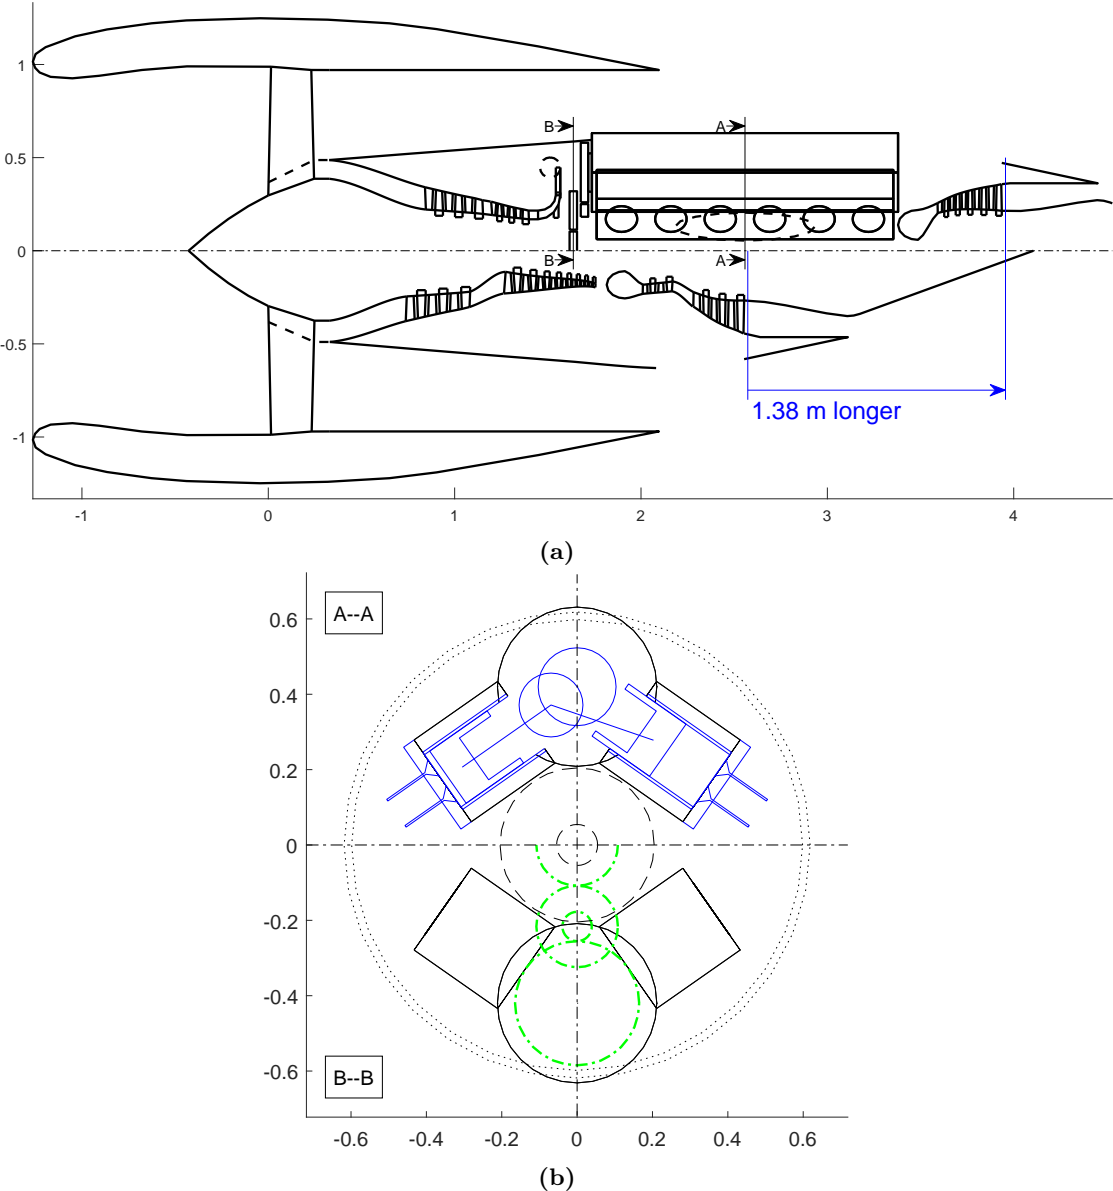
(a) General arrangement of the baseline CCE (top) drawn against the reference GTF (bottom). (b) Cross-sectional view through the piston engine (top) with piston engine gearbox (bottom).
